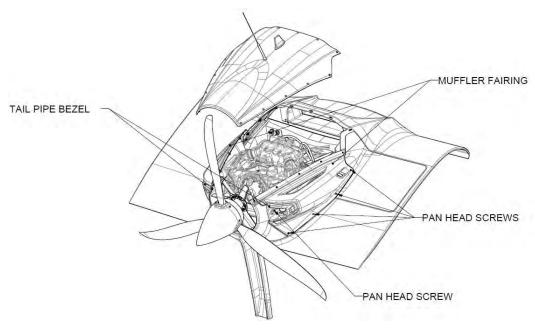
REMOVING EXHAUST FAIRINGS
